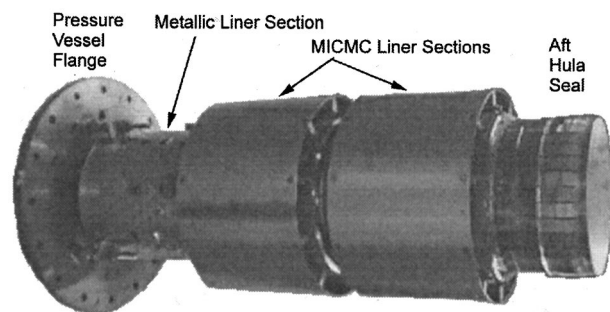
Photograph of the liner assembly for the Frame 5 combustor test rig
